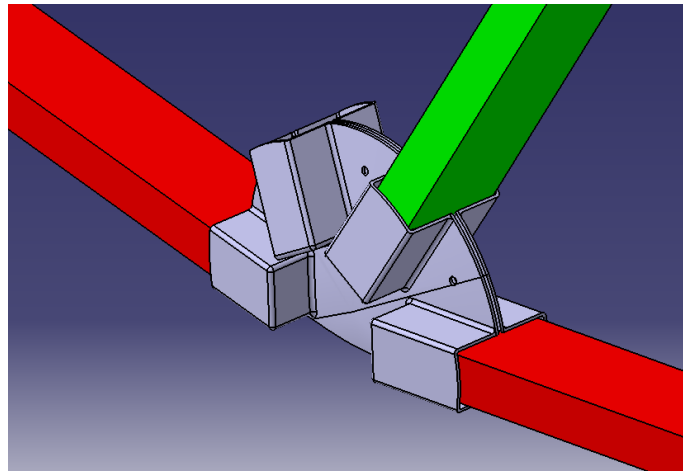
Mounting scheme for joint 4 with bottom rods.
